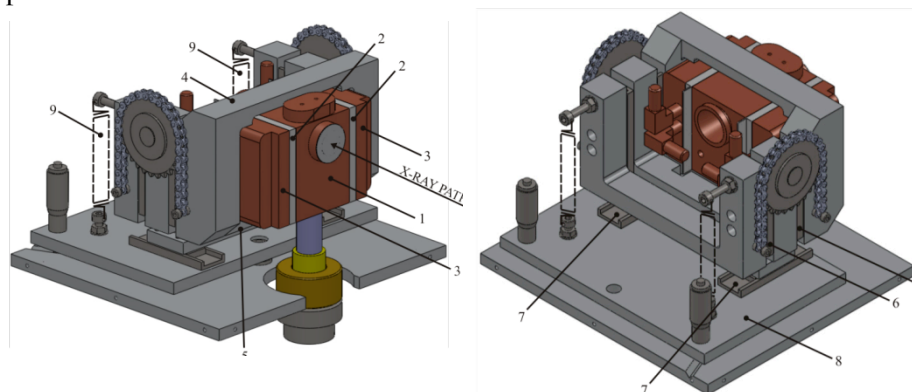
Cold-stage assembly mounted on three-axis slide system. 1-cold block, 2-thermoelectric coolers, 3-water cooled heat exchangers, 4-cooler compression frame, 5-lateral slides, 6-vertical slides, 7-longitudinal slides, 8-pitch and roll plate, 9-counter load springs
